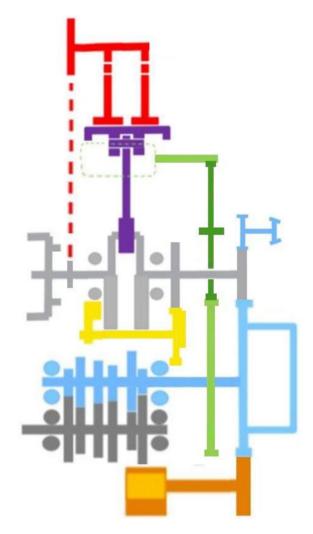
ENGINE LAYOUT YAMAHA YZ250F
